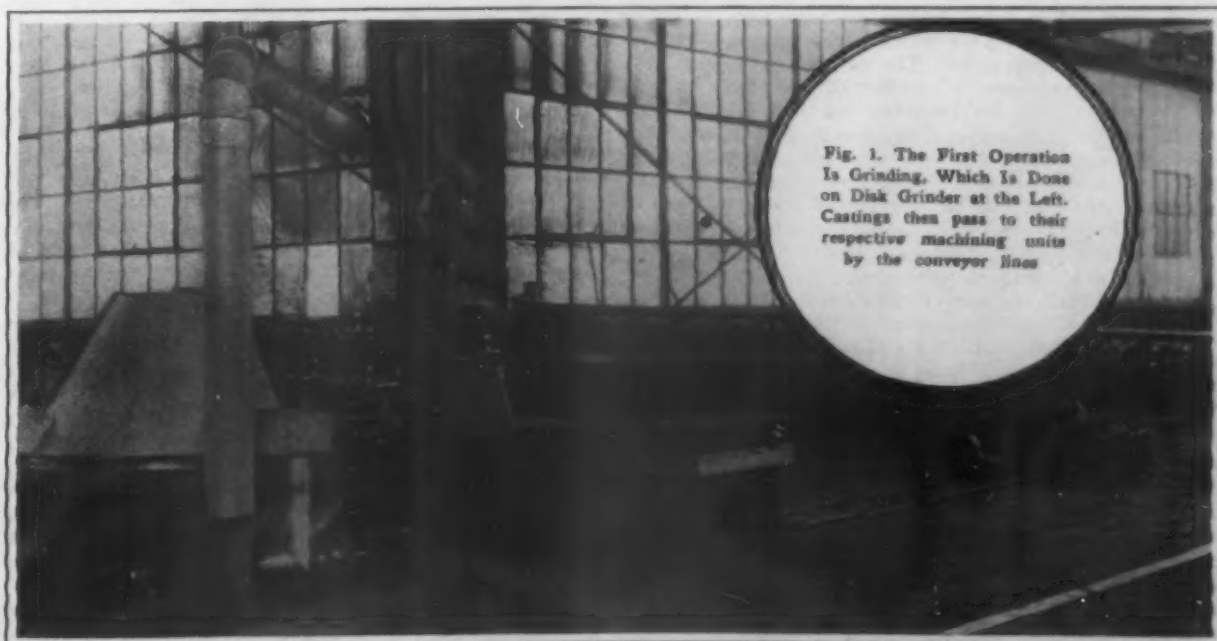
The First Operation Is Grinding, Which Is Done on Disk Grinder at the Left. Castings then pass to their respective machining units by the conveyor lines
